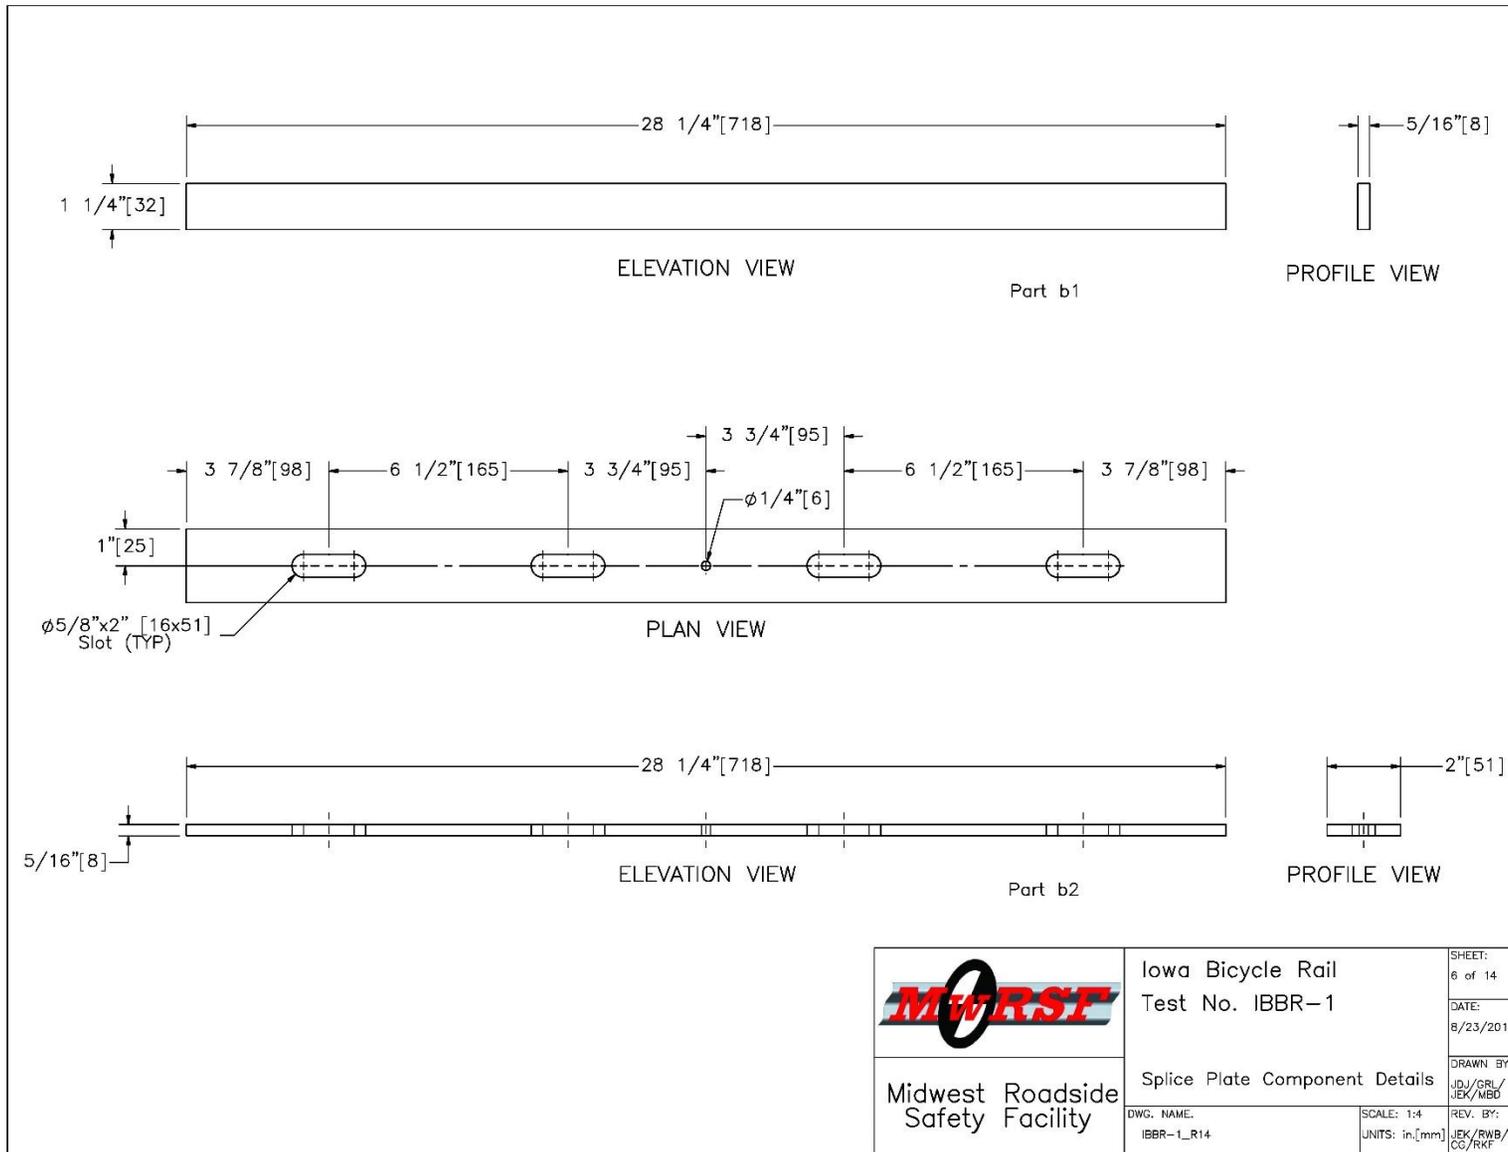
Splice Plate Component Details, Test No. IBBR-1
